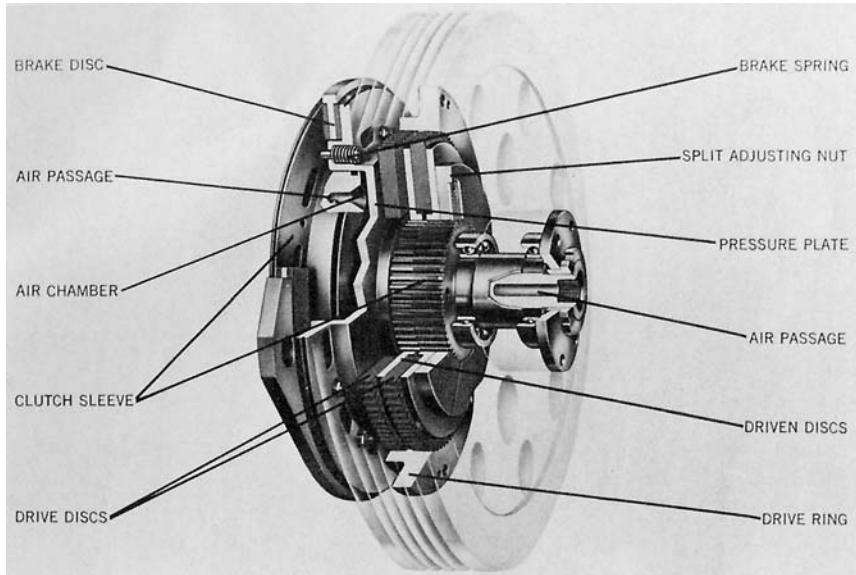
Combination disk brake and disk clutch, both dry. (Courtesy of Minster Machine Co., Minster, OH.)
